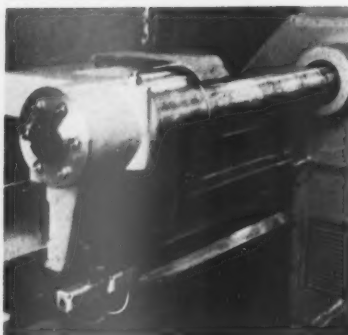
Rear view of the Carlstedt machine showing the neat arrangement of the headstock which permits quick work-handling
